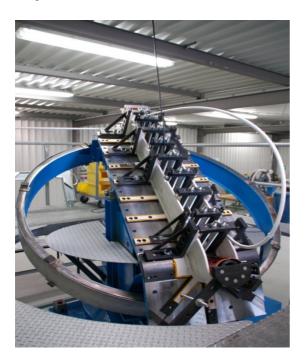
Winding machine with test winding for the Nb₃Sn dipole.
